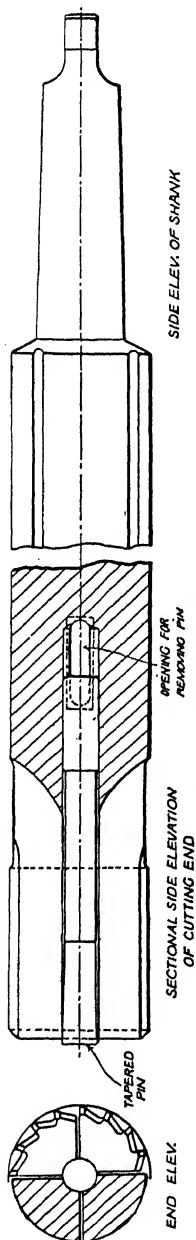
Rose Reamer Cutting on End. Expanded with tapered pin
